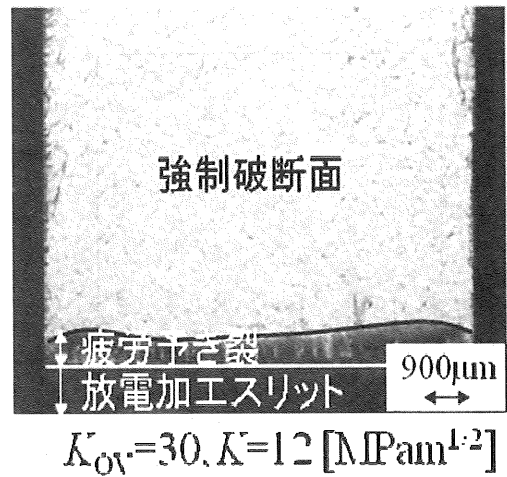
Fracture surface of SUS304 SCC tested
